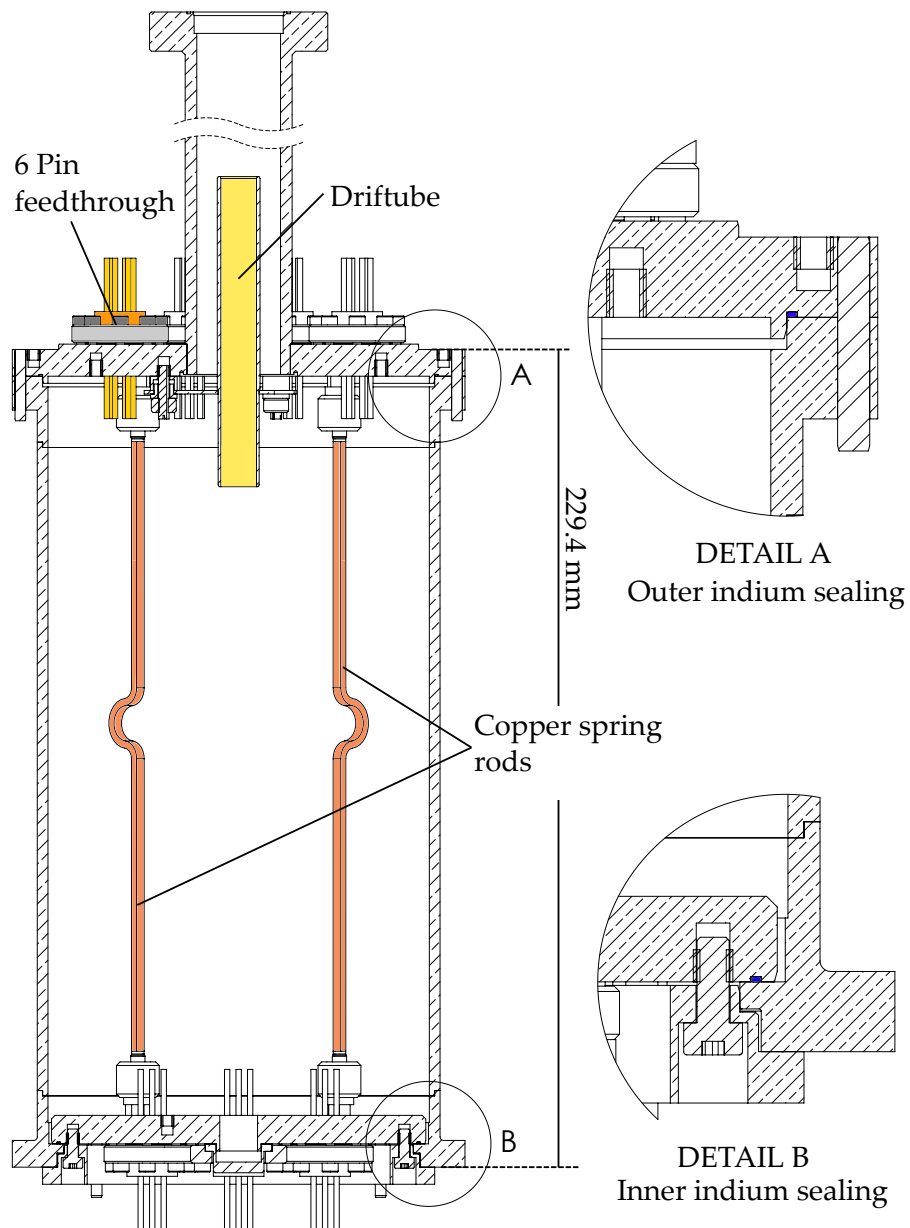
Drawing of a cut through the trap chamber. Highlighted are one 6 pin feedthrough, the drift tube, the copper spring rods and the both indium sealings. The copper spring rods are necessary to keep the two flanges on distance while installing the trap. When the chamber is closed the two indium sealings needs to be tightened simultaneous.
